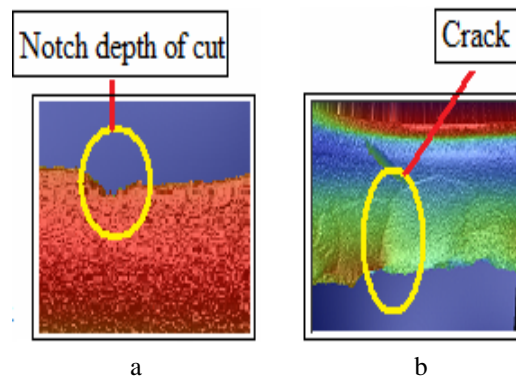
Interferometric picture of (a) C2 cutting edge and (b) C5 cutting face
